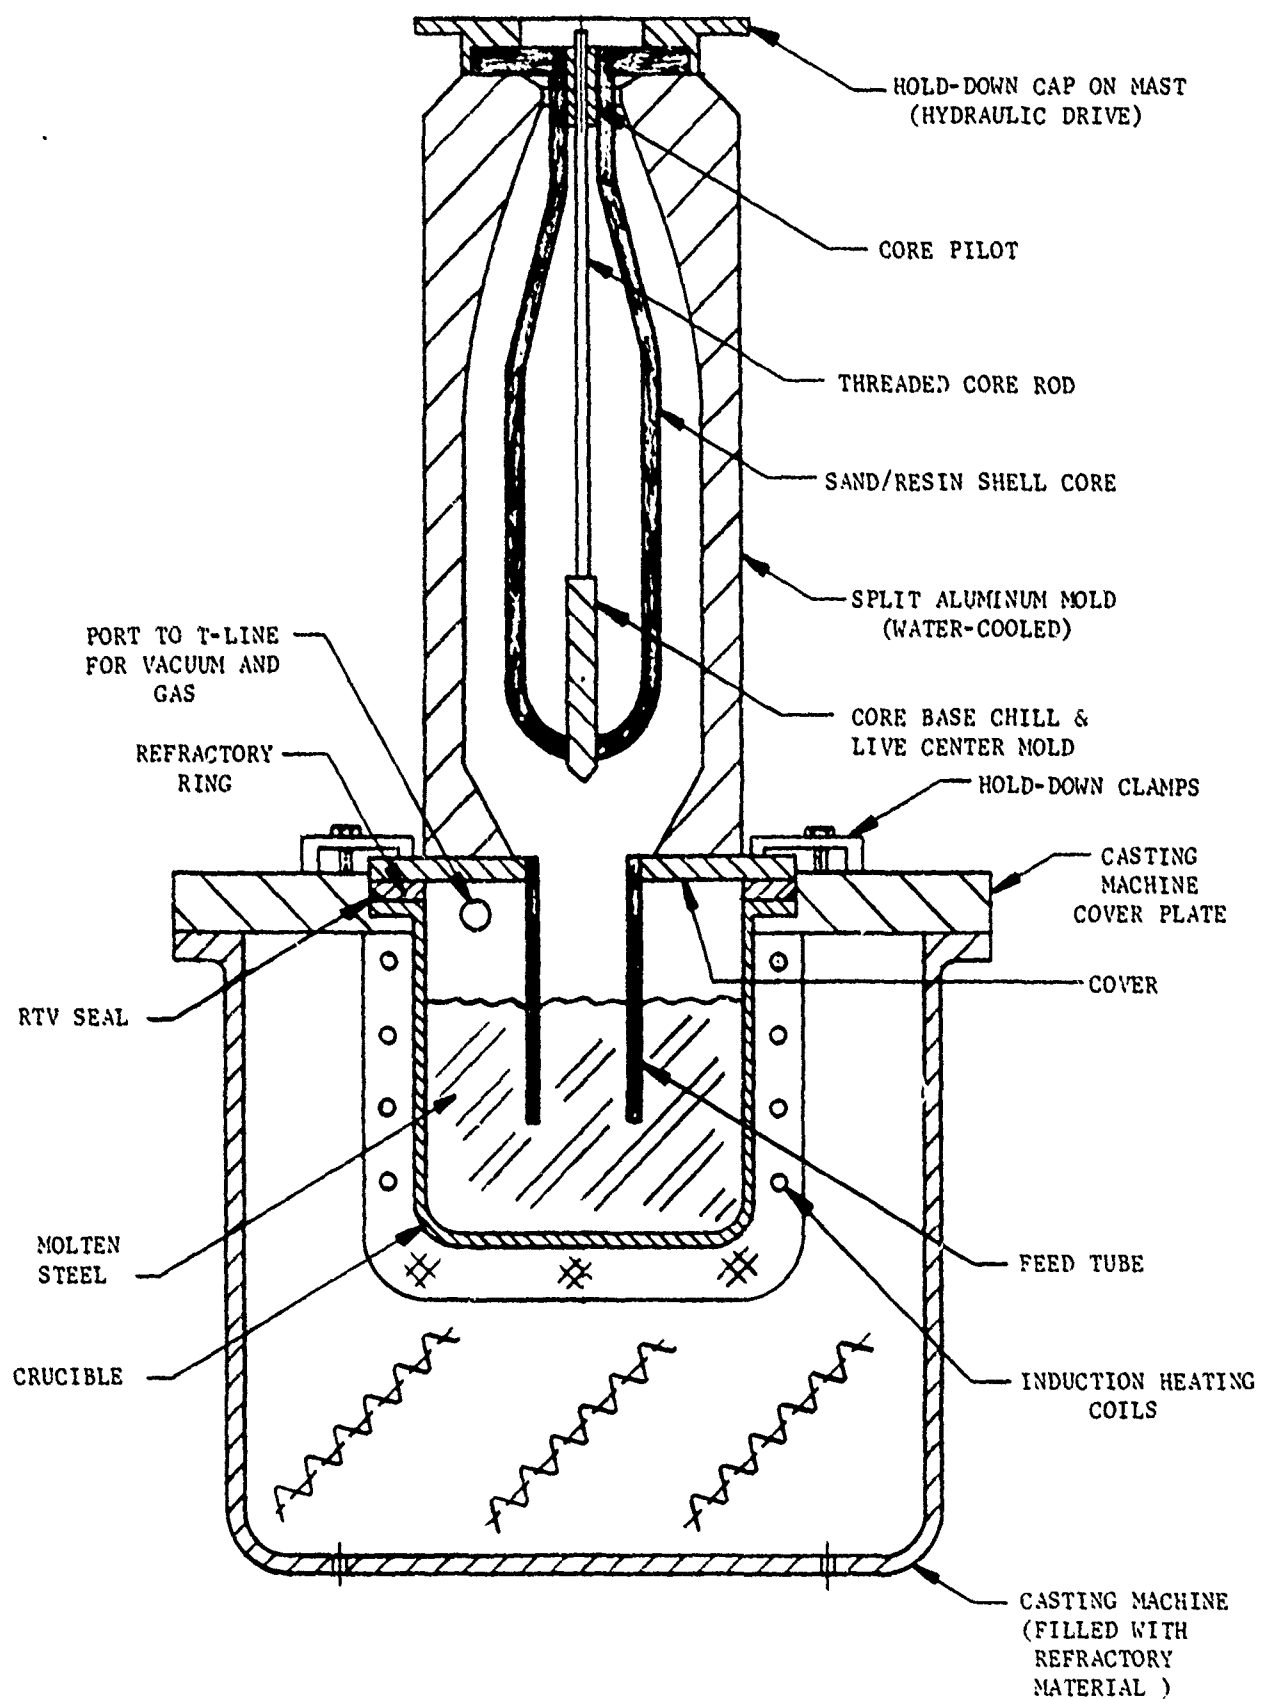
Schematic of Reynolds Pressure Casting Machine.
